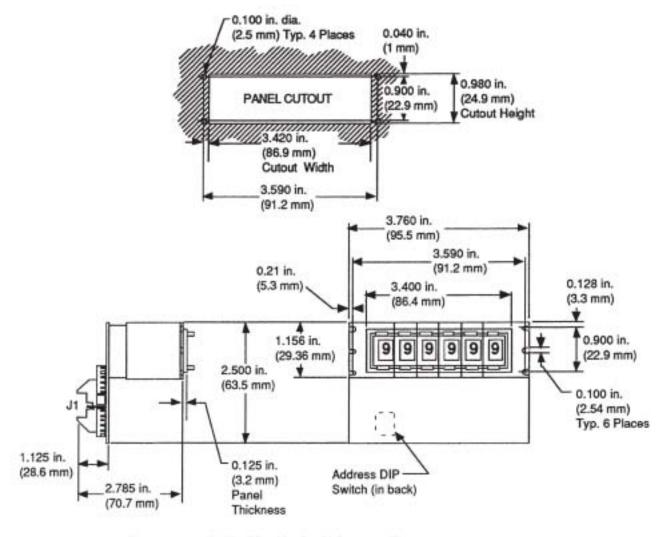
473.07c Thumbwheel Mounting Dimensions
